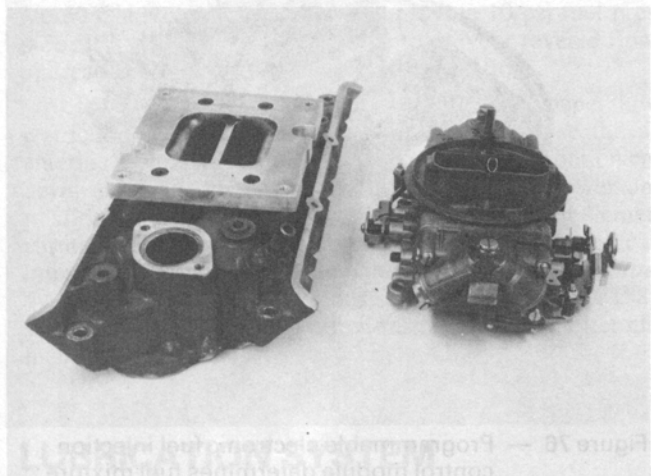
Production two-barrel intake manifold modified for four-barrel carburetor.
